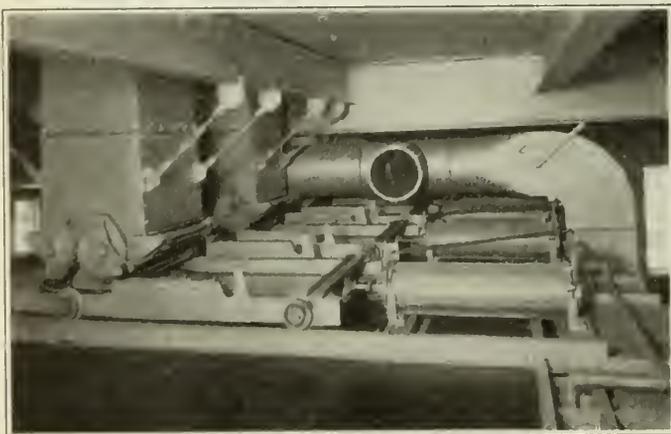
Chutes Connecting Feeding Floor to Furnaces, Hopper Doors and Rams.
